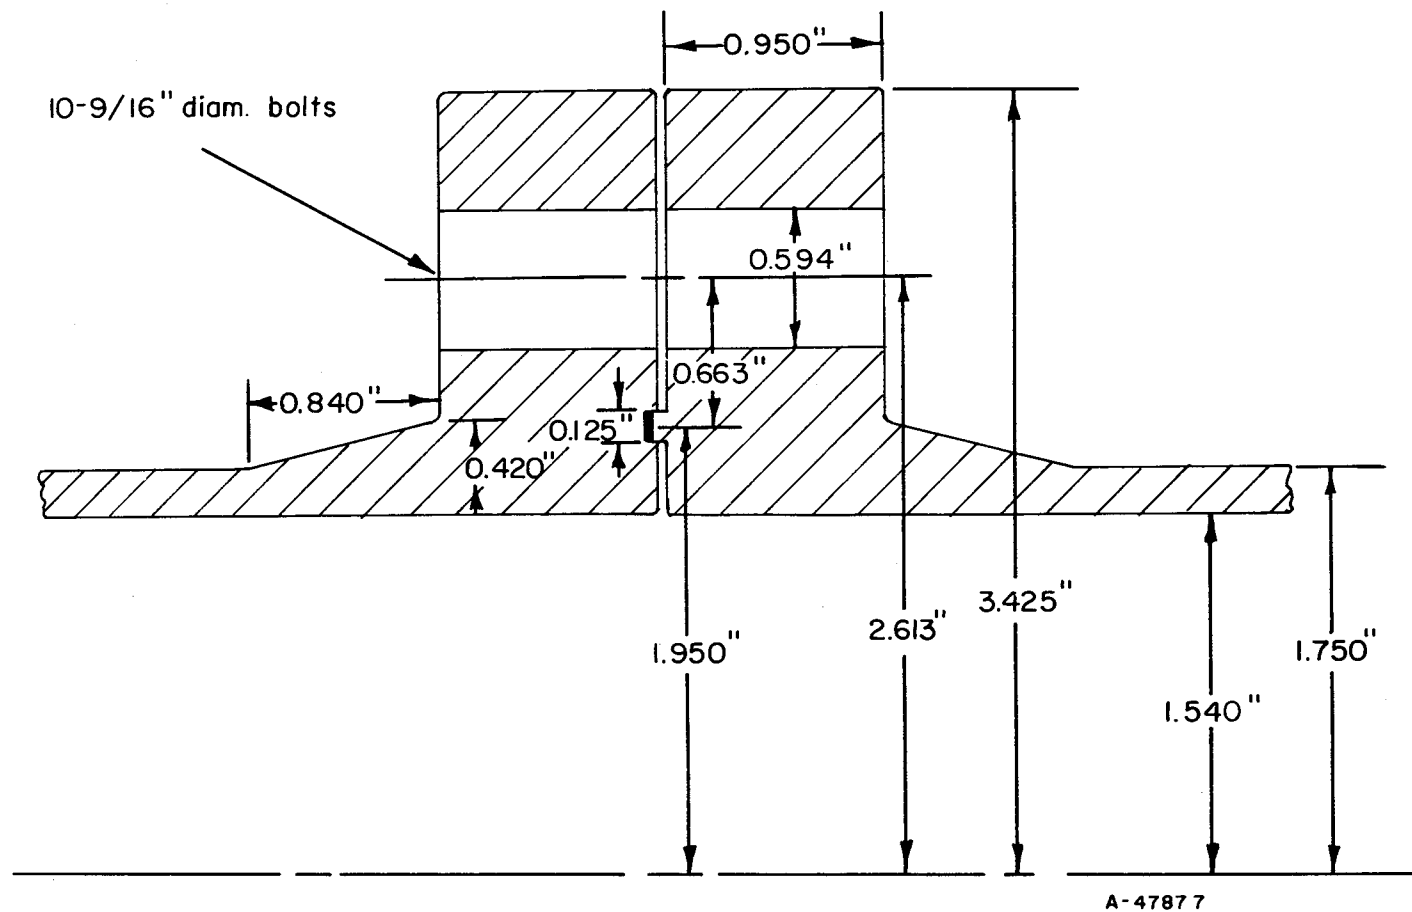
INTEGRAL-TYPE FLANGE GEOMETRY (RENÉ 41 - 1500 F)
